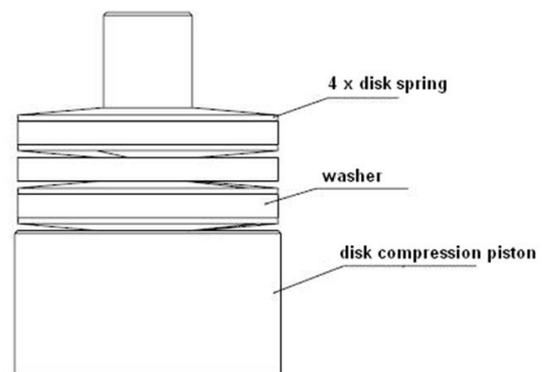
The 4 memory shape disks in bearing preload arrangement
